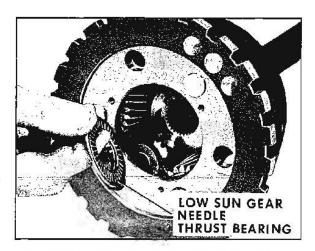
Installing Low Sun Gear Needle Thrust Bearing
